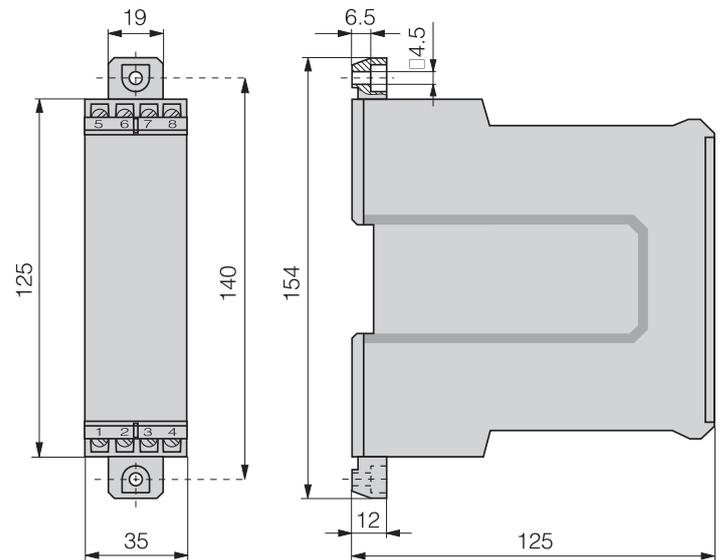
Transducer with the screw hole brackets pulled out for wall mounting
